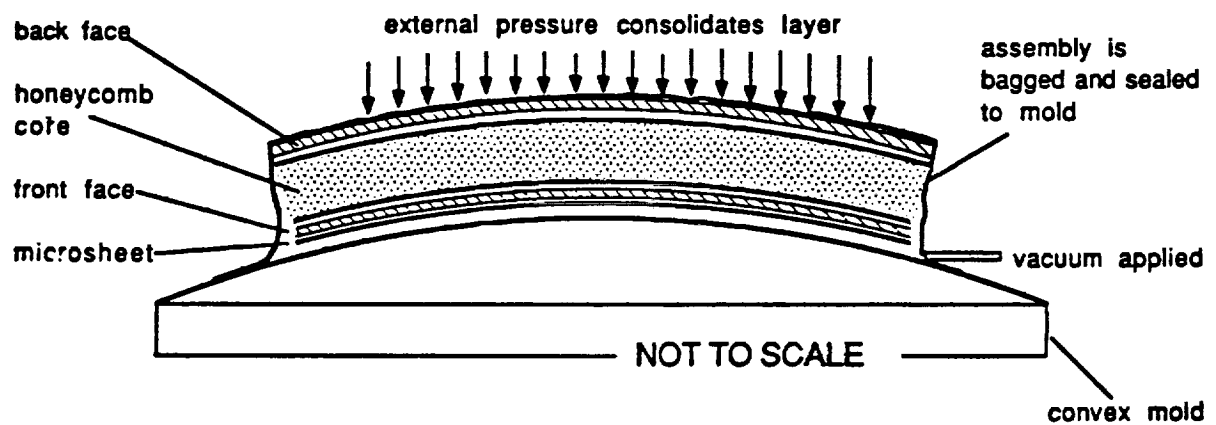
Typical panel assembly sequence. Panels are formed over a convex mold under vacuum and external pressure.
